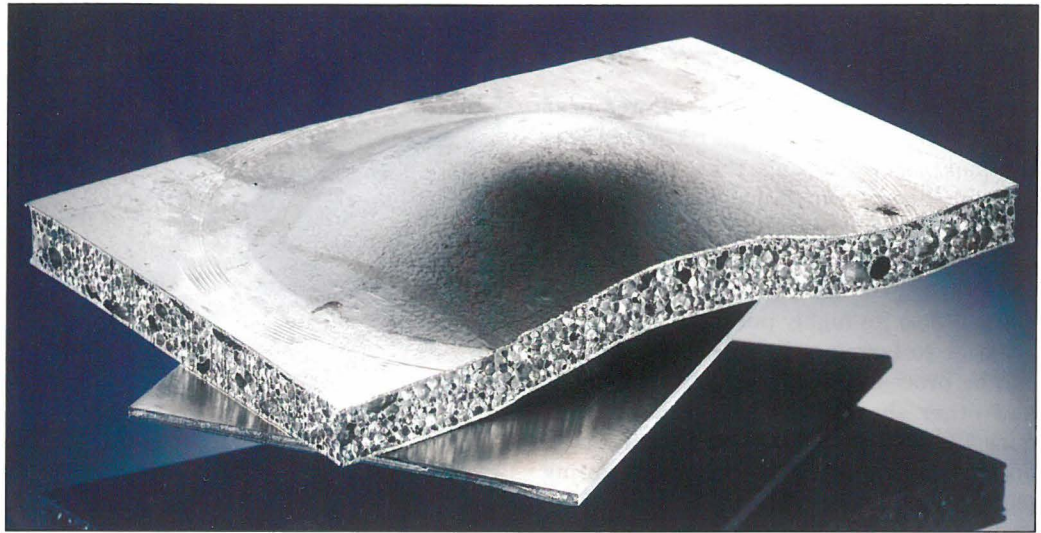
A shaped part made by filling a hollow steel mould with aluminium foam.
